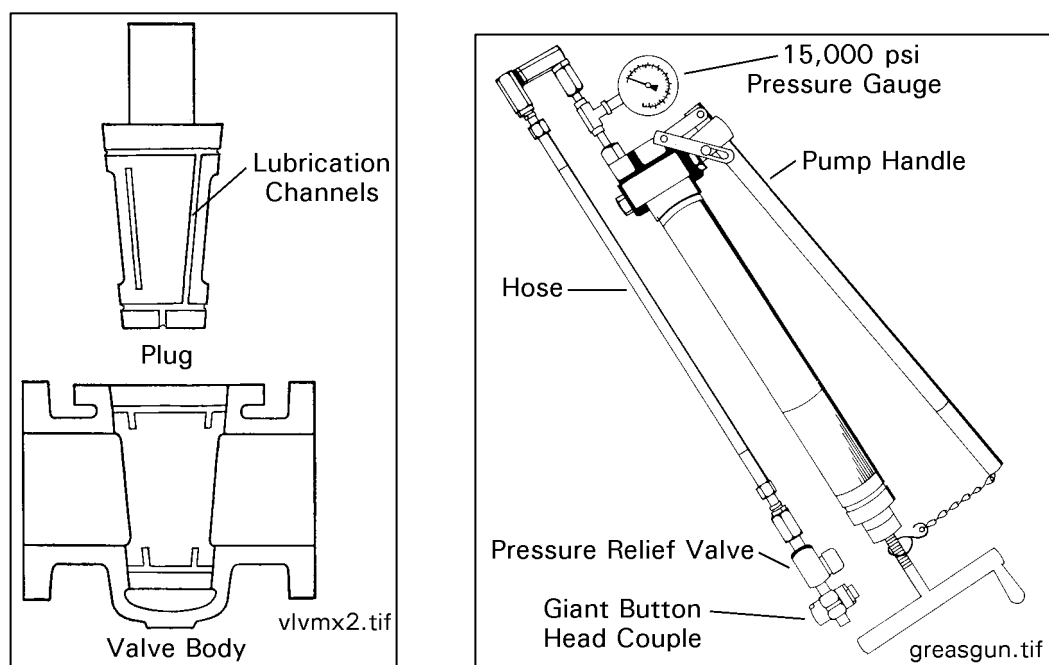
Typical Plug Valve Lubrication Channels and Typical Grease Gun
